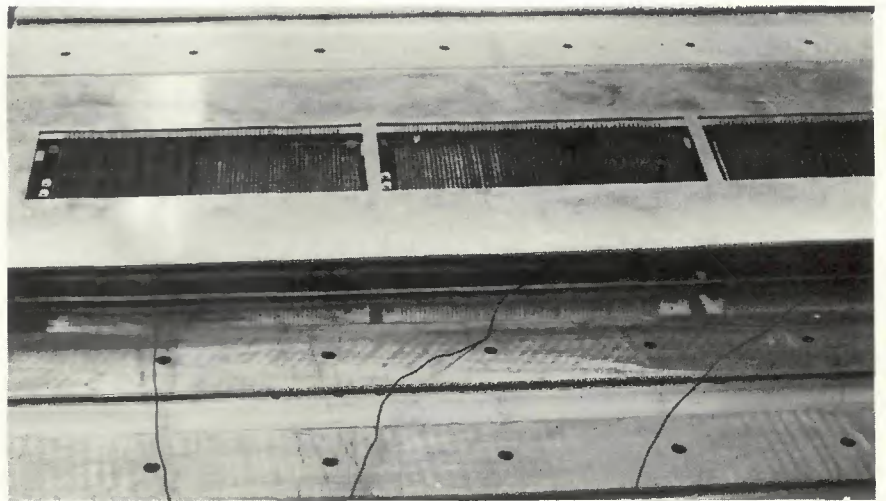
Typical terminal/multilayer board assembly with aluminum shield and thermocouple probes
